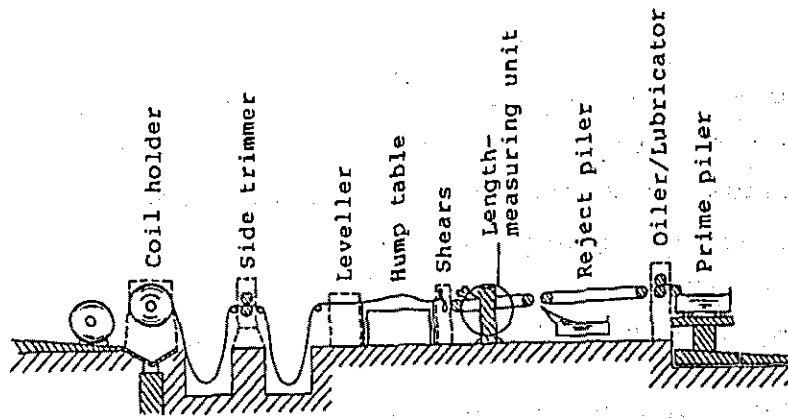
No. 2 Shear Line (Up-Cut Shear Type)
